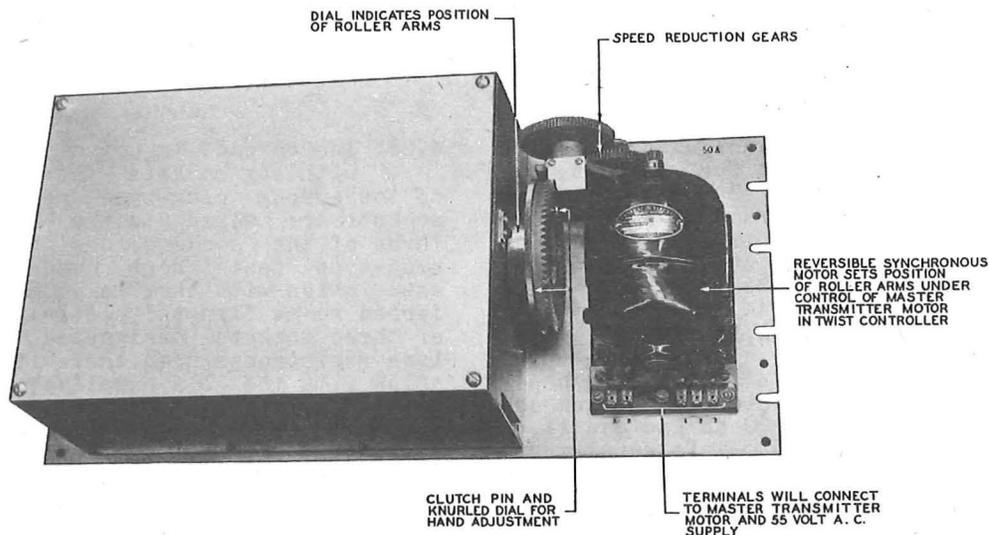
A - 50A Drive (Receiver Motor and Six Regulators)
